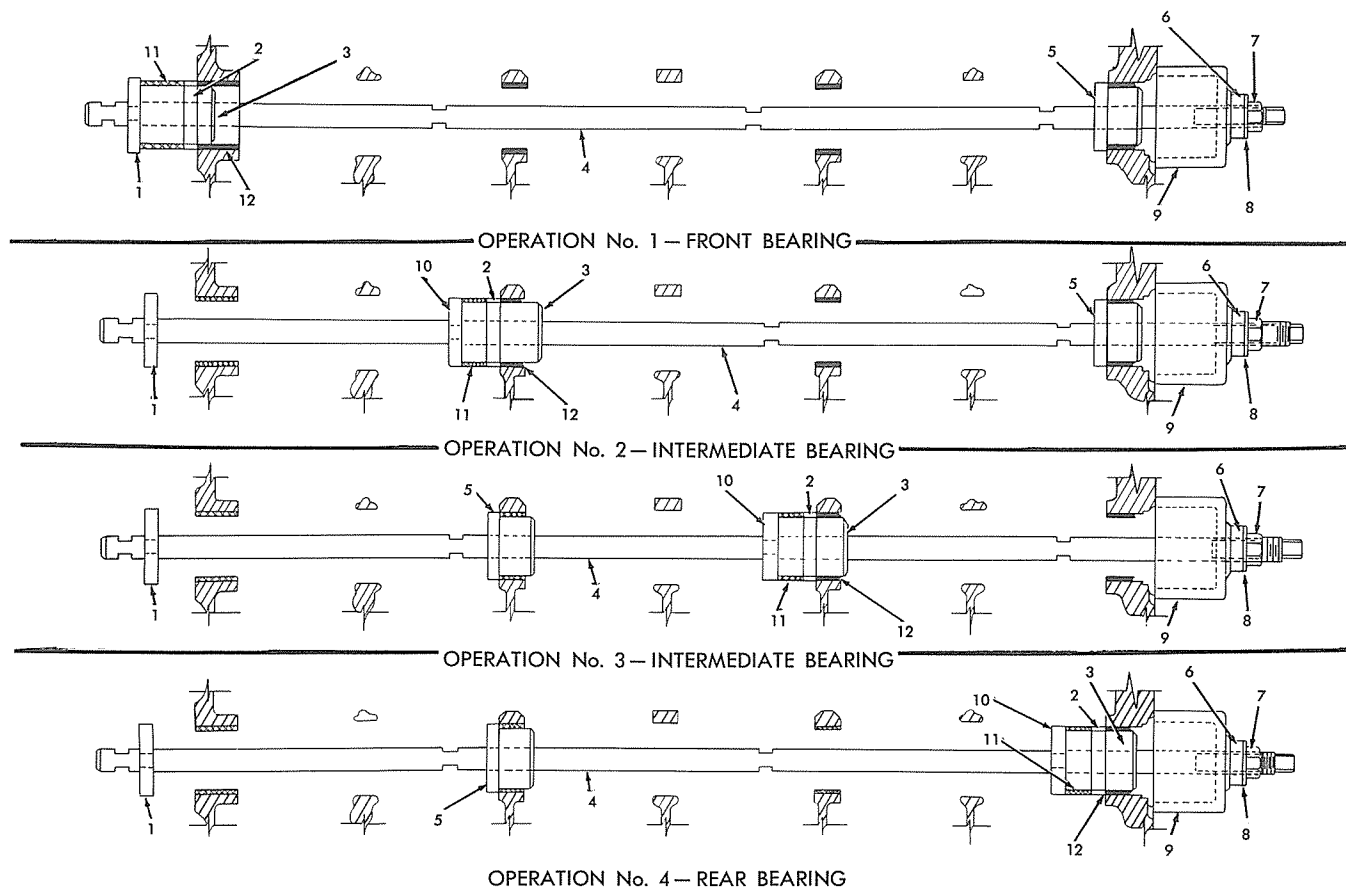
Sequence of Operations for Removing and Installing Camshaft Bearings
